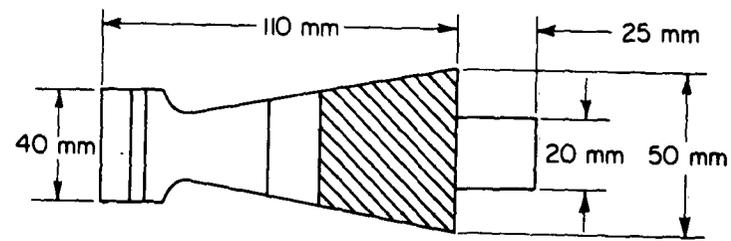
SETUP FOR INTRODUCING VIBRATIONS INTO WELD POOL
